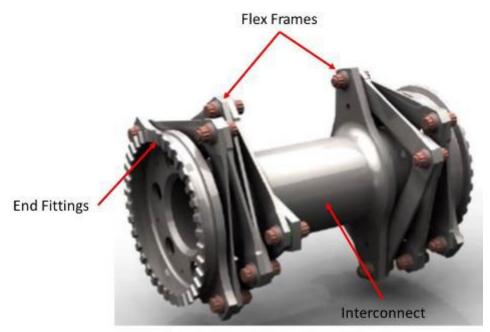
KAFLEX DRIVESHAFT COUPLING; COURTESY OF KAMATICS
